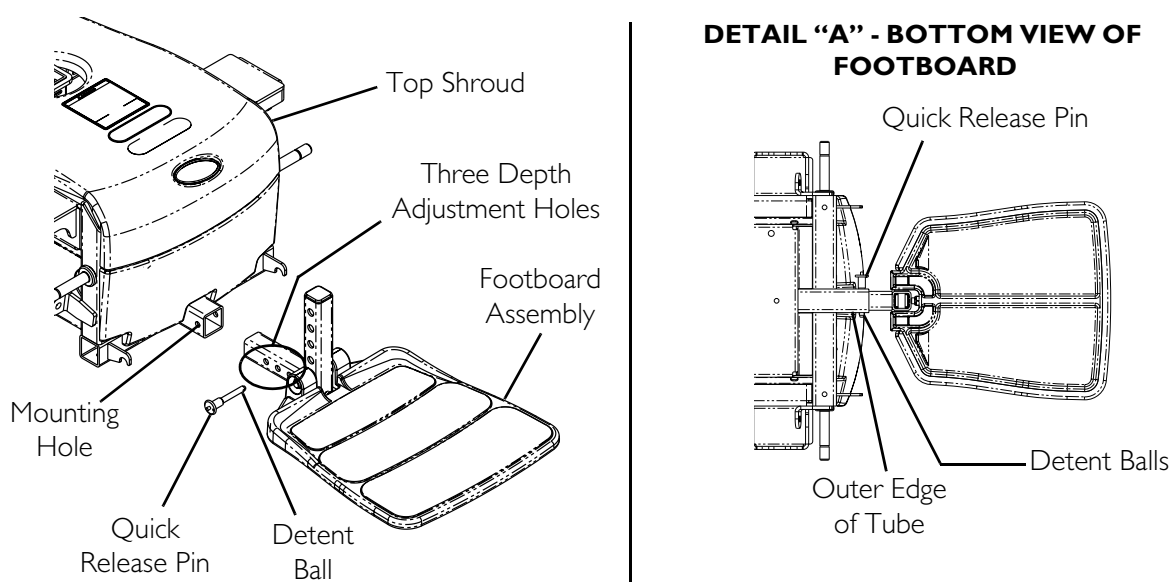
Adjusting the Footboard Assembly - Depth
